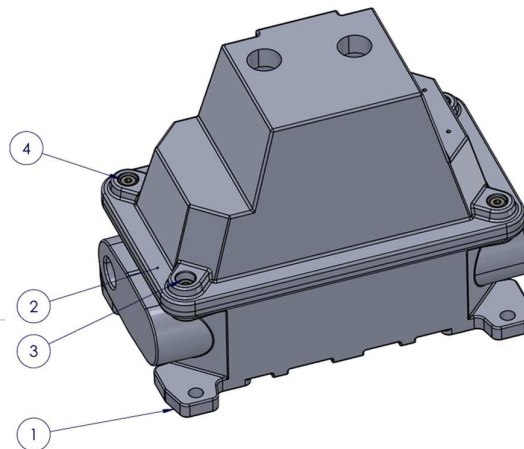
Initial model: 1-lower housing, 2-upper housing, 3-washer, 4-screw
